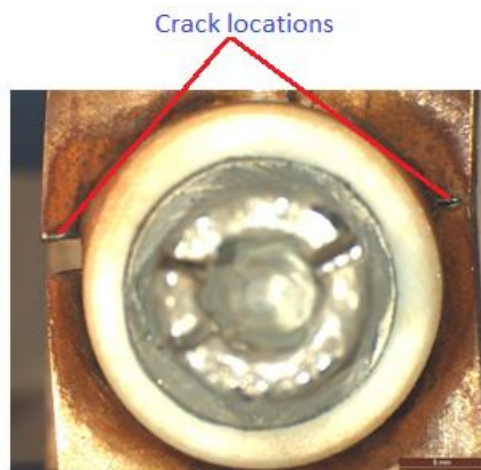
S470 U-bend specimen showing location of cracks at the bolt hole.
